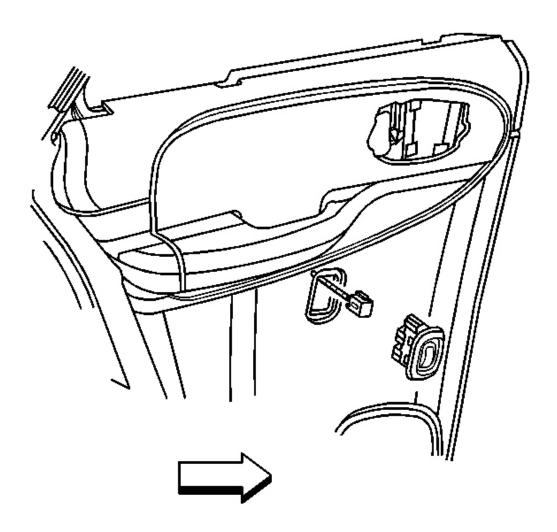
View Of Window Switch Bezel From Door Trim Panel Courtesy of GENERAL MOTORS CORP.
